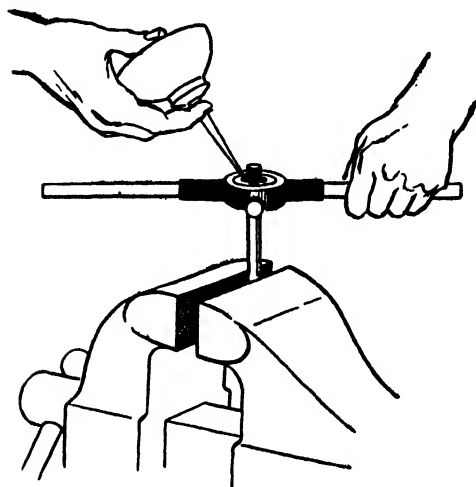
When threading steel rods or bolts, always lubricate the die with lard oil or a threading oil. Oil makes the die turn more easily, cut smoother threads, and last longer.
